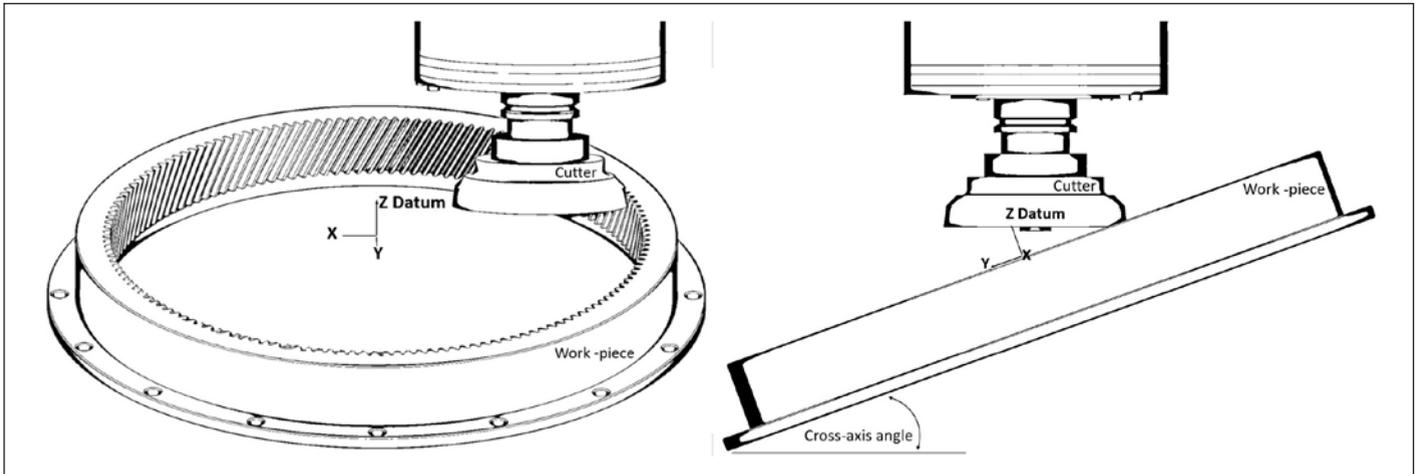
Proven gear skiving strategy in the XZ (left) and YZ (right) planes.
